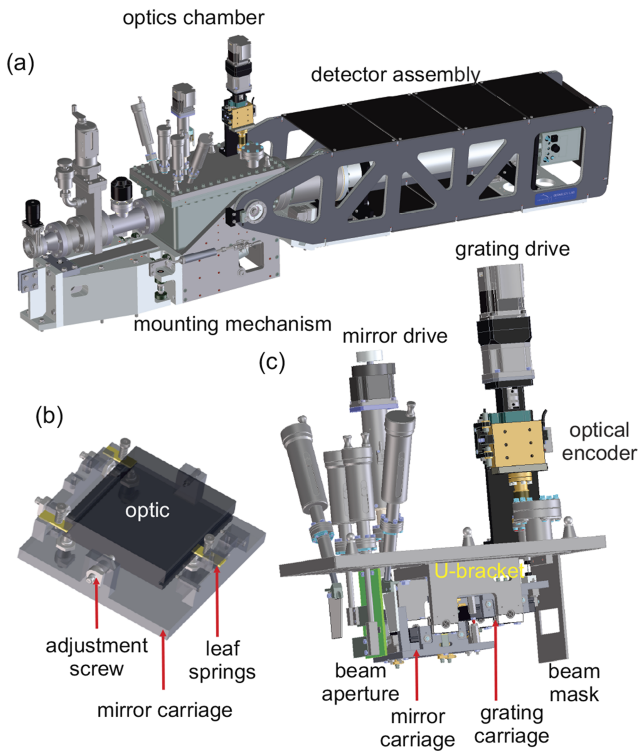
CAD models showing (a) an overview of MXS, which comprises three major components: optics chamber, detector assembly, and mounting mechanism, (b) the optics carriage, and (c) the interior view of the optics chamber.
